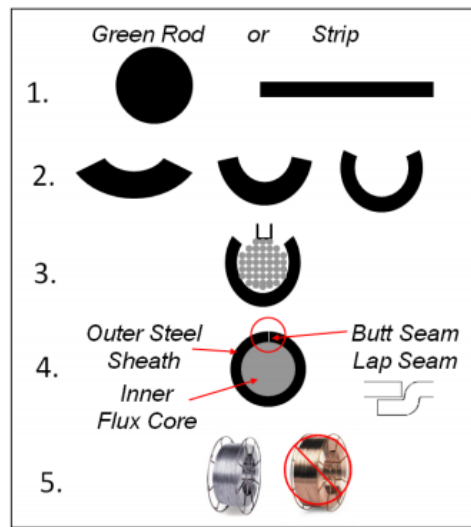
The basic manufacturing Inner shield Electrodes steps [6]
